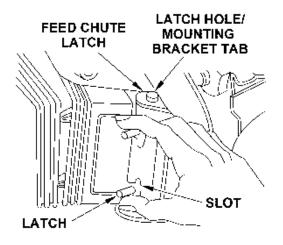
AP Feed Chute Latches and Latch Holes Mounting/Bracket Tab Inspections.
